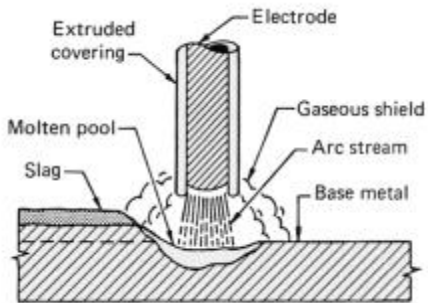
This shows how the coating on a coated (stick) electrode provides a gaseous shield around the arc and a slag covering on the hot weld deposit.
